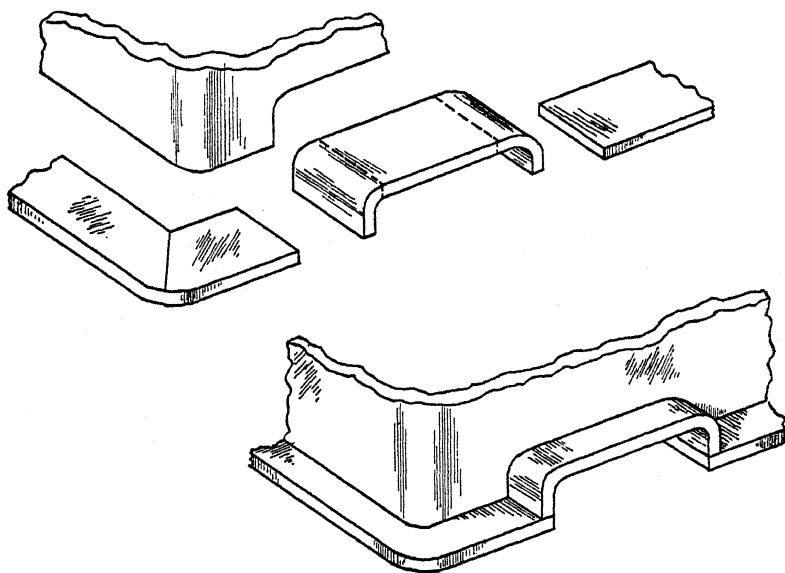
A study in styling by welded design, showing how round corners and grooves may be secured where desired. The design is extremely simple and inexpensive.
